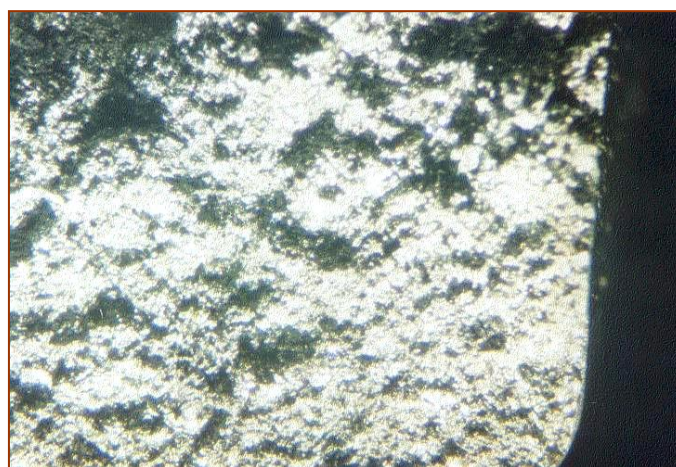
Brittle Fracture Surface (mag. 6x)
